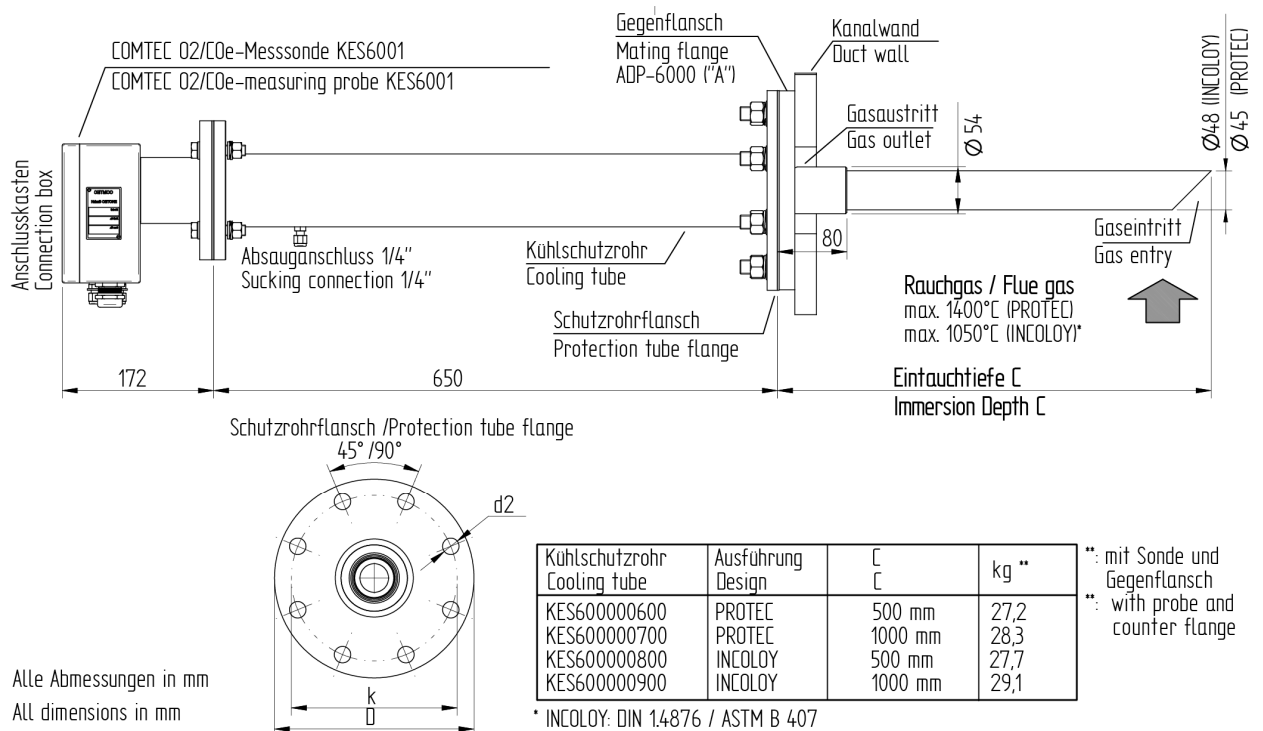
Dimensional drawing of probe KES600x with cooling protection tube
